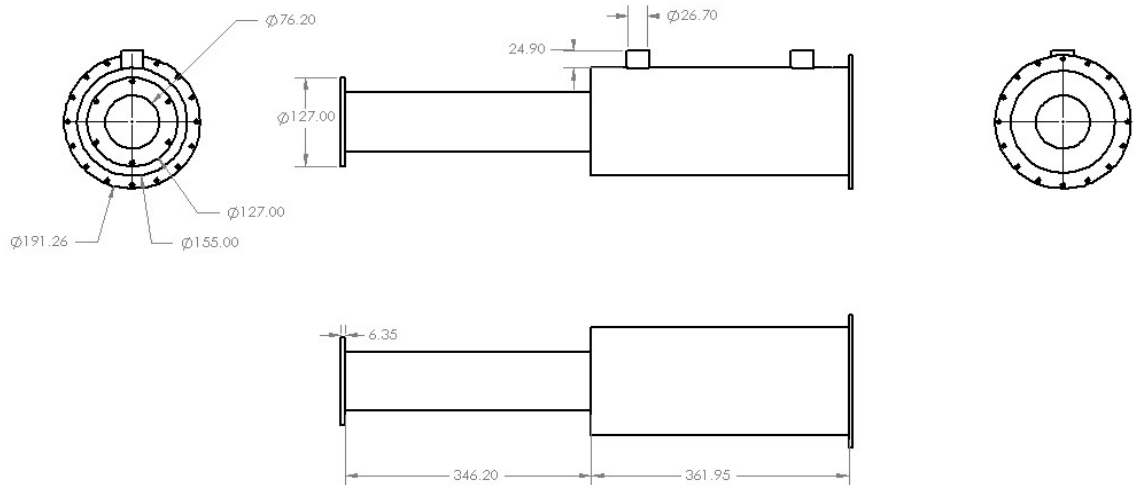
CAD drawing of Inlet section (dimensions)
